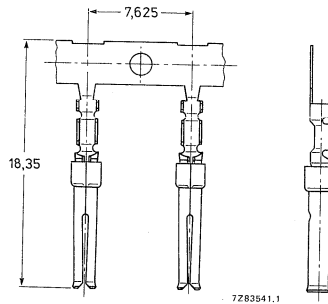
Crimp contact sockets for AWG28 to AWG30 wires, on band.
